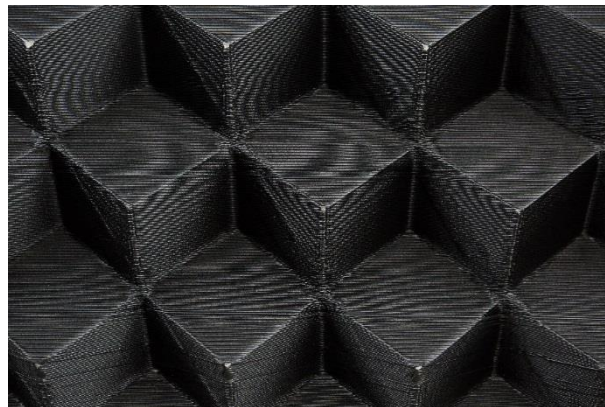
Module of 3D printed Canal House, an application of FDM to full-scale 3D printing (Picture: Martin de Bouter)
